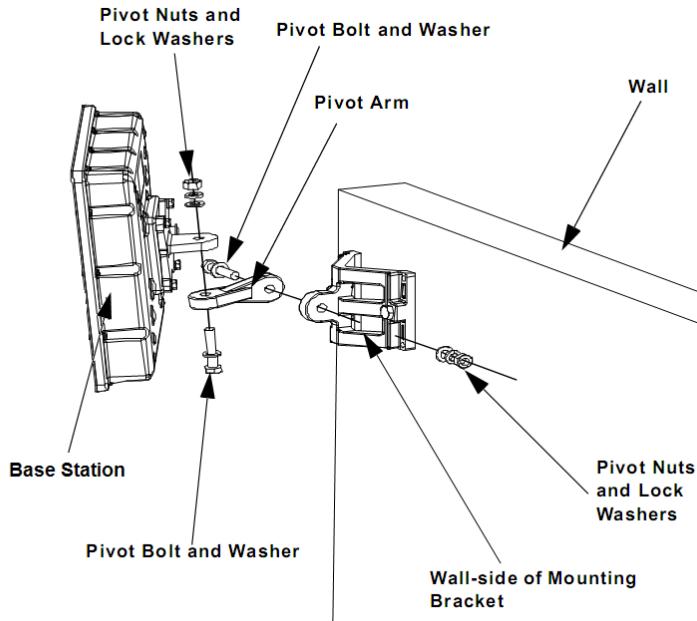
Bolting the Subscriber Station to the Wall Bracket
